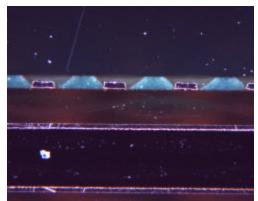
Cross Section of Laser Exposed Pads in Solder Mask
